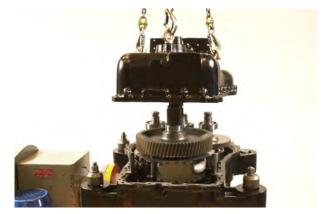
Support transmission case with a chain hoist. Remove transmission case to motor case screws and lock washers.
